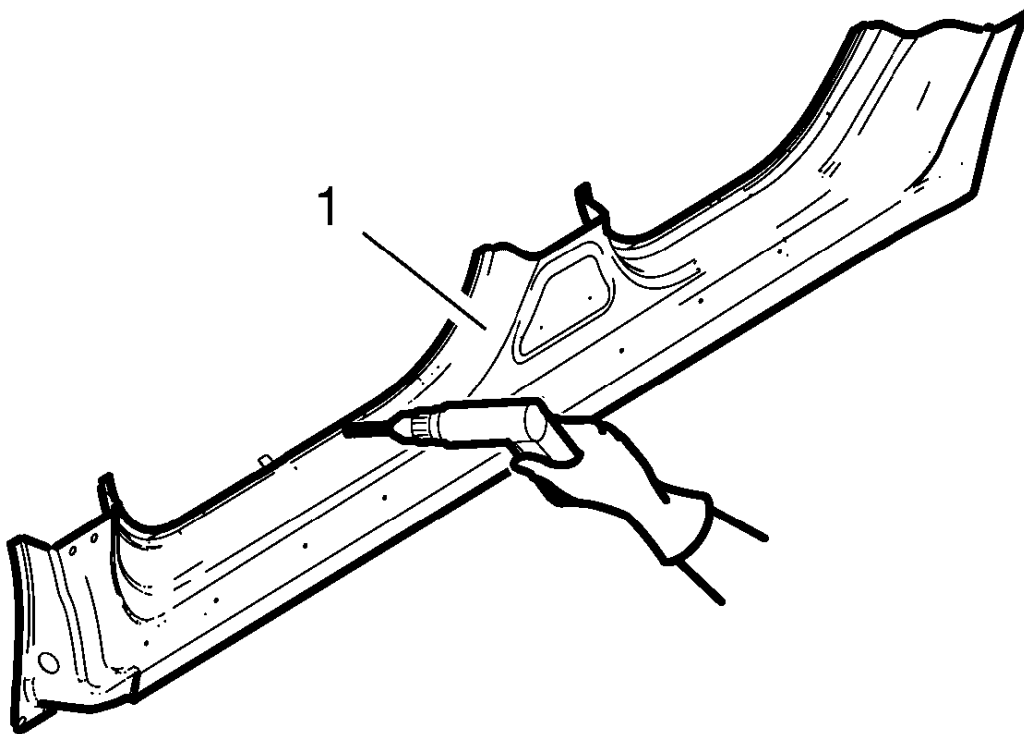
Drilling Hole For Plug Welding New Rocker Outer Panel
